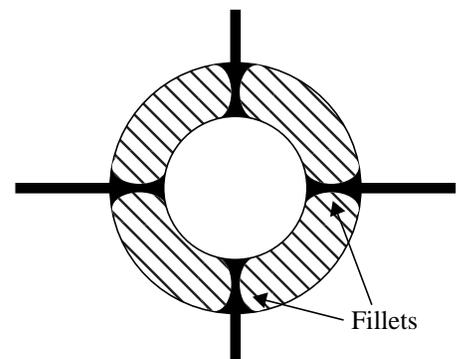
Rear View of Terrier Showing Internal Fillet Detail
